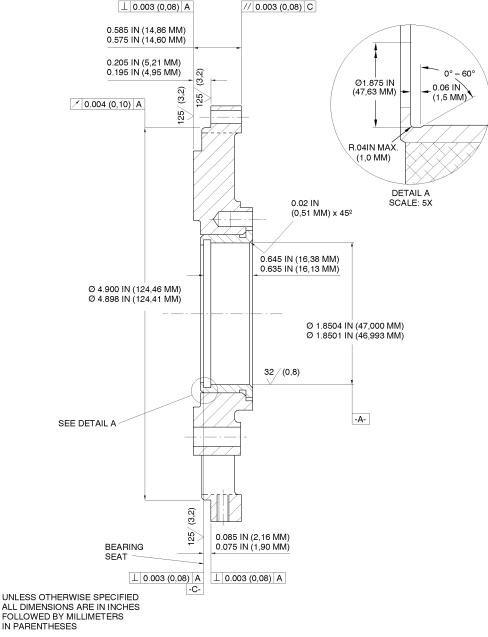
Anti-Drive End End Bell Machining Specifications
